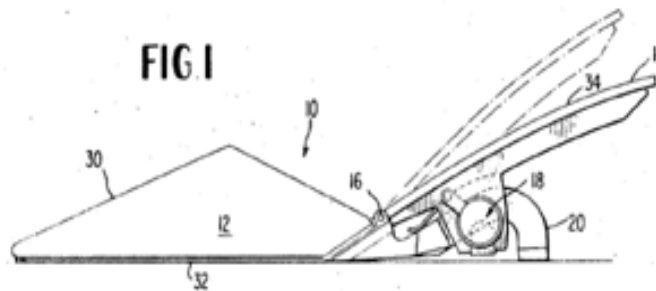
Shoe with a hinged mechanically adjustable heel [9]
